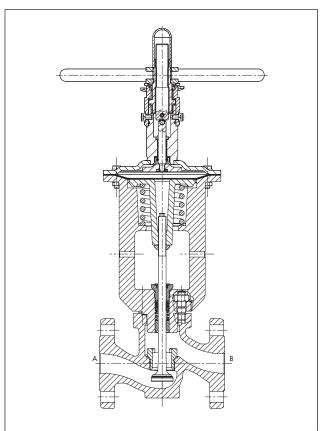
Type 3351 Pneumatic On/off Valve with handwheel
